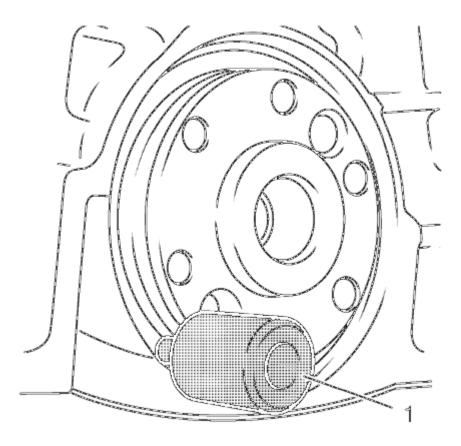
Crankshaft Rear Oil Seal Removal Tool Courtesy of GENERAL MOTORS COMPANY
